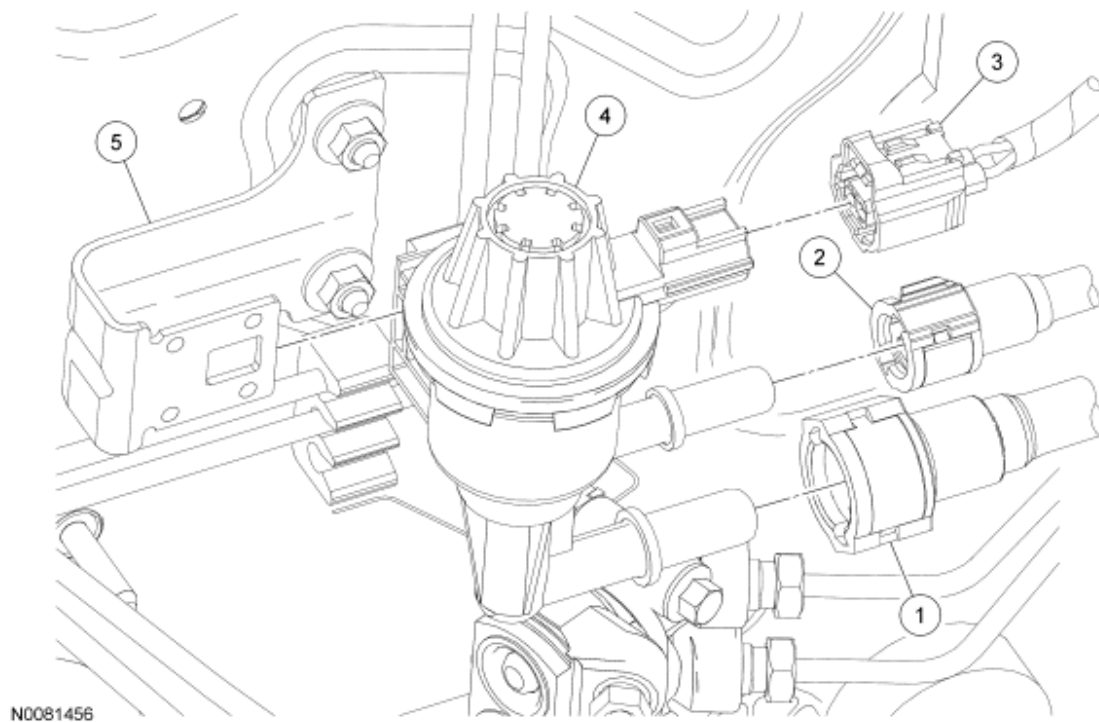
Exploded View Of Evaporative Emission Canister Purge Valve
